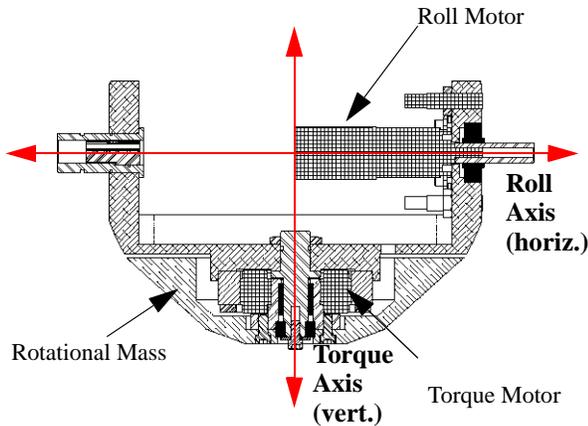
The structural “yoke”, with roll and torque mechanisms attached.
